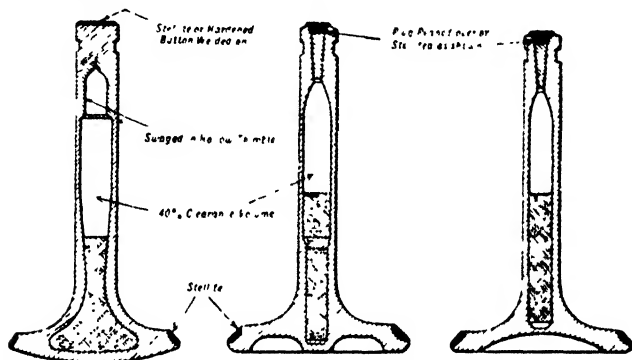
TYPES OF SODIUM FILLED AIRCRAFT ENGINE VALVES
